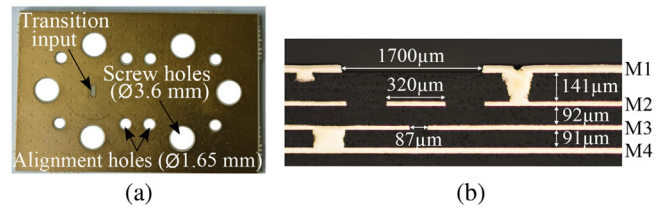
| Fabricated back-to-back RWG-to-SIW transition. (a) Top view of the PCBs with waveguide flange alignment and screw holes. (b) scanning electron microscope (SEM) image of the cross-section indicating the average measured patch, slot, cavity and dielectric height dimensions.
